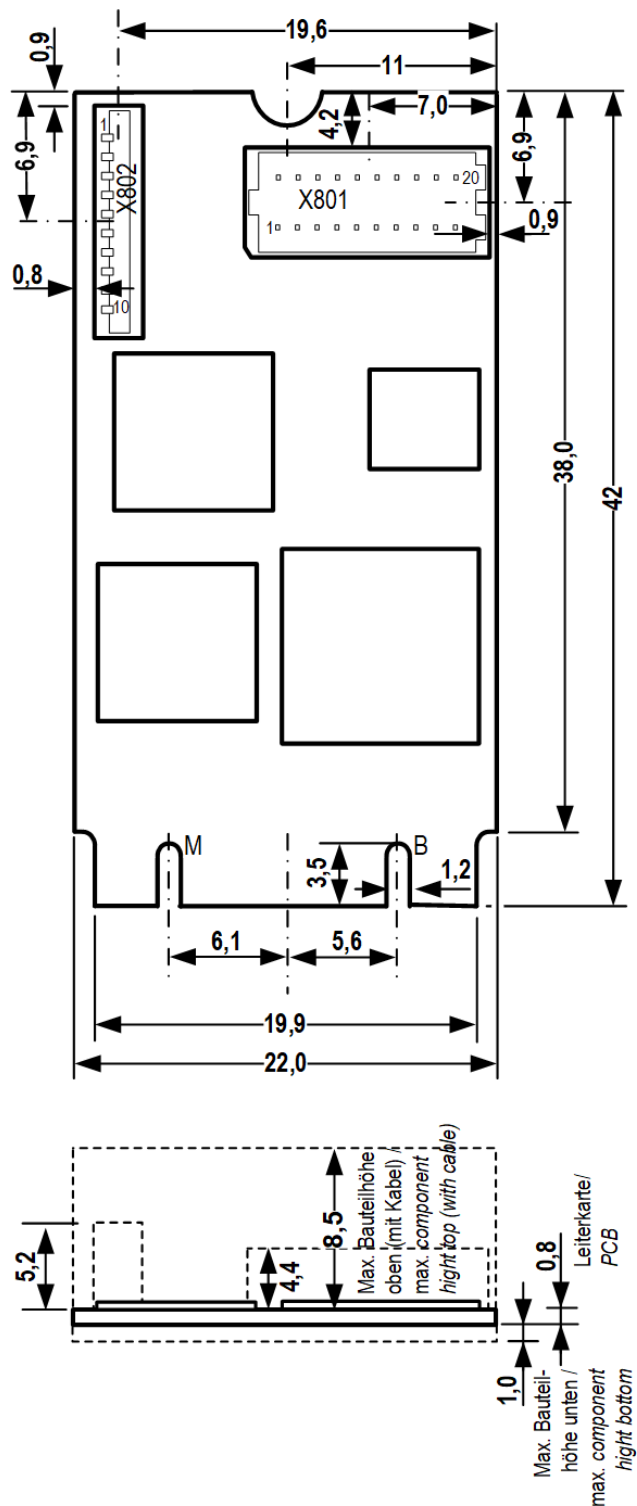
Dimensions CIFX M224290BM (Revision 2)
